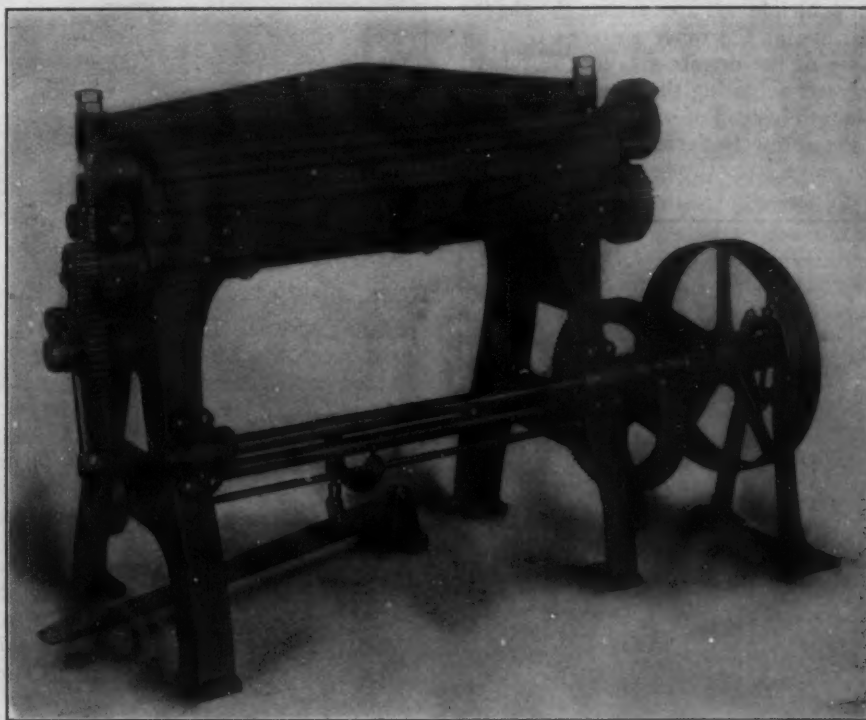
A 36-In. Leffler Power Bar Folder.
